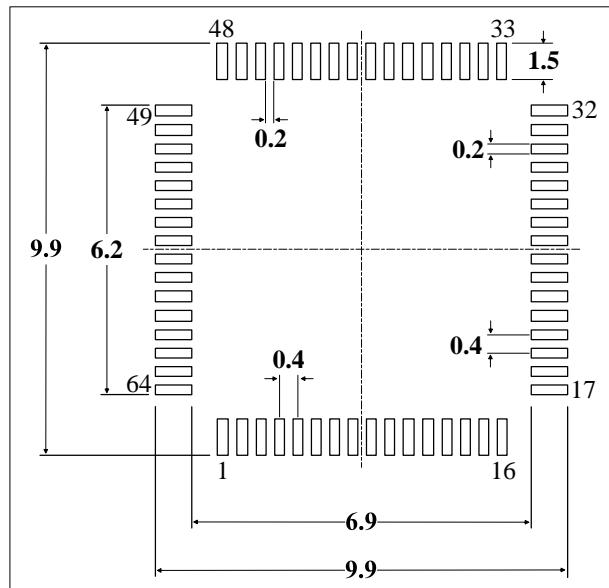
Suggestions for LQFP64 (7x7mm) package solder pads⁽¹⁾
